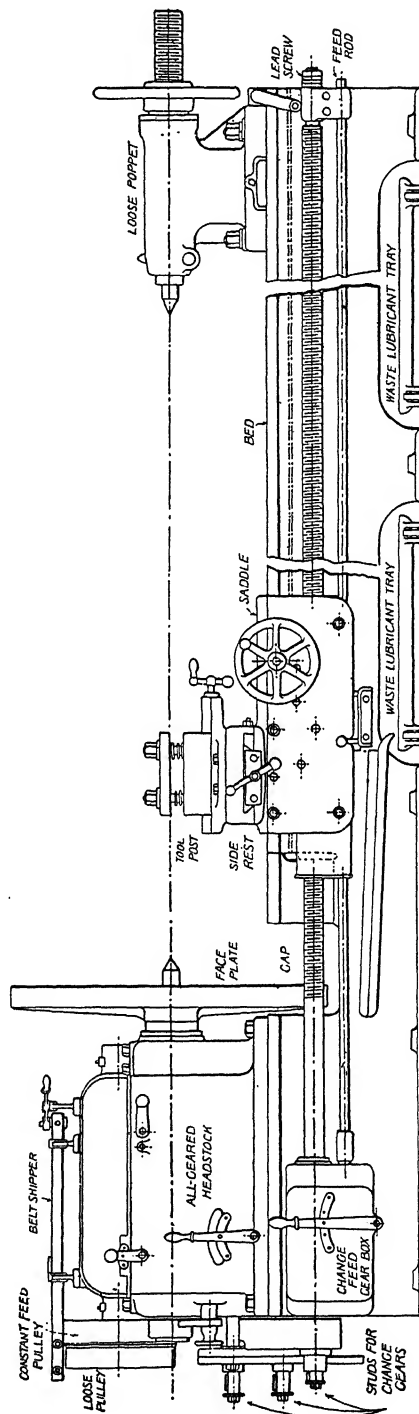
All-gearred Head, Self-acting, Sliding, Surfacing, and Screw-cutting Lathe. Pulley speed, 650 r.p.m. Twelve spindle speeds, 4.5 to 170 r.p.m.
